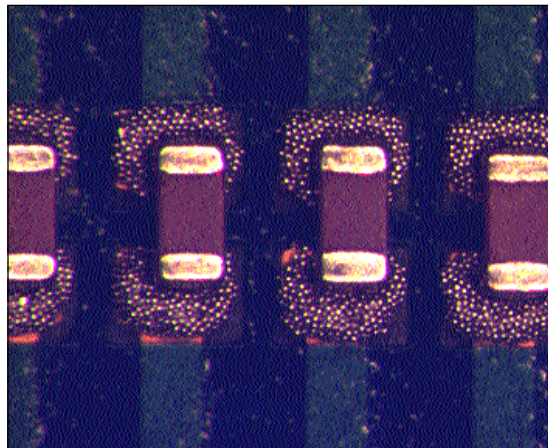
0201 Components Placed on Wet Solder Paste on Attachment Pad Design BEG
